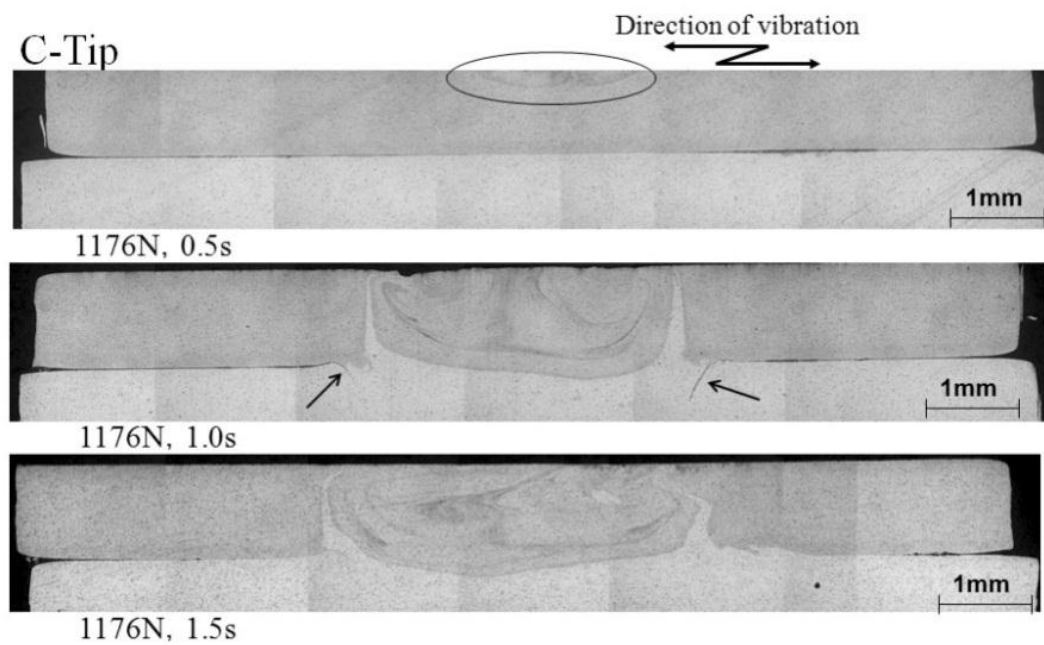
Al-Al welds produced using C-tip welding tool [39].
